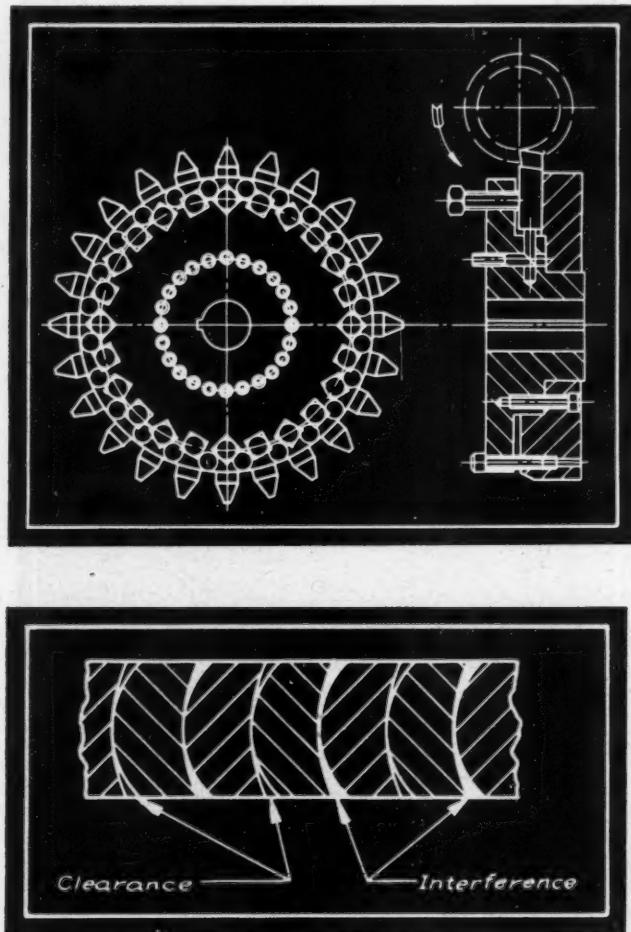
Top—Cutter head for producing basic globoid worm has teeth representing section through throat plane of gear
